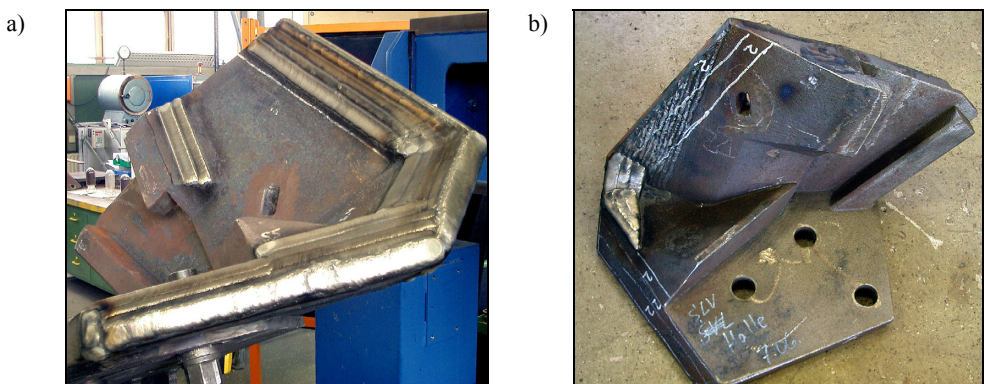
Plasma-arc powder surface-welded new cutting edge geometry
